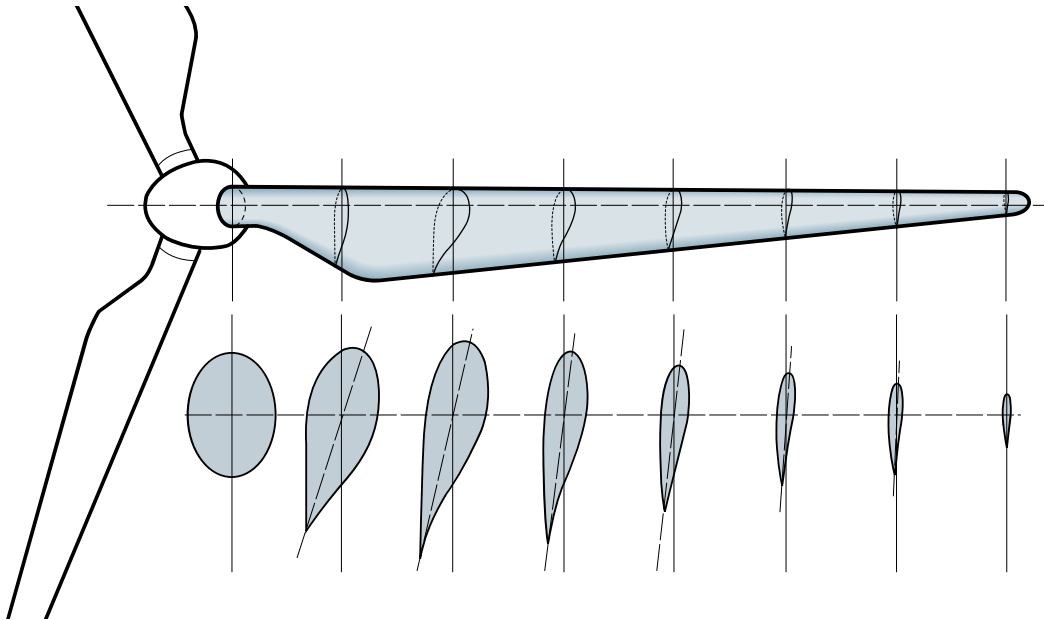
Blade profile from base to tip: cross-section. Source: Plantas eólicas/ABB Cuaderno técnico.
